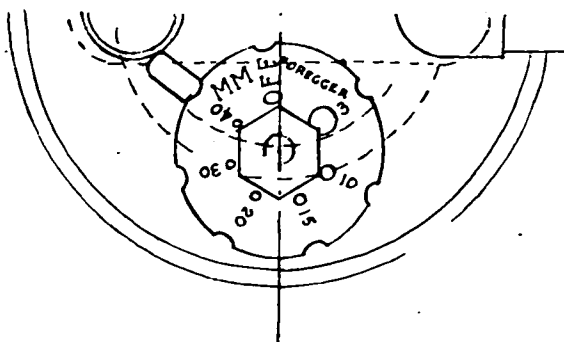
Valve assembly—top view showing adjustable maximum pressure release (blow-off valve).
